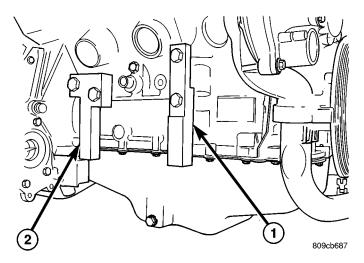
ADAPTER TOOLS MOUNTED ON BLOCK
